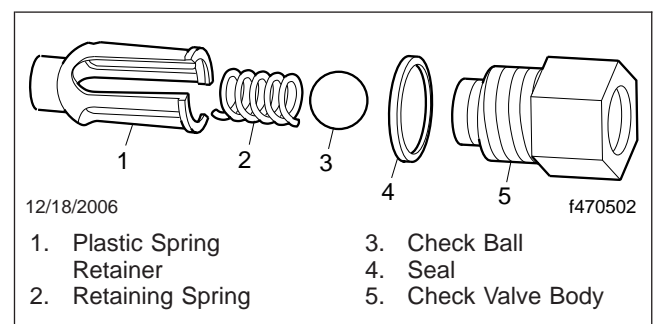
, Check Valve Assembly, Fuel Pro Configurations
